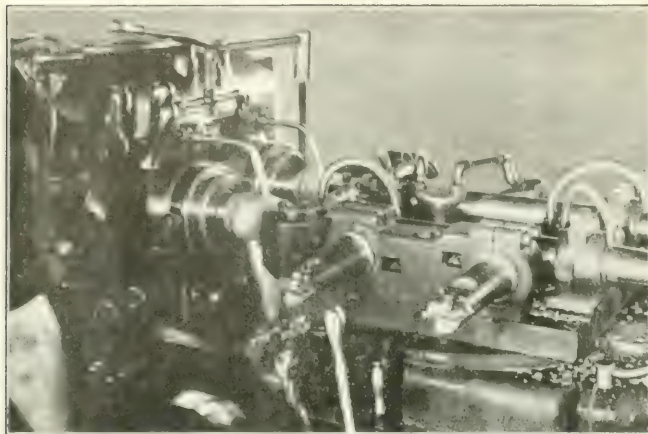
INSIDE BORING ON JONES & LAMSON DOUBLE SPINDLE FLAT TURRET LATHE
